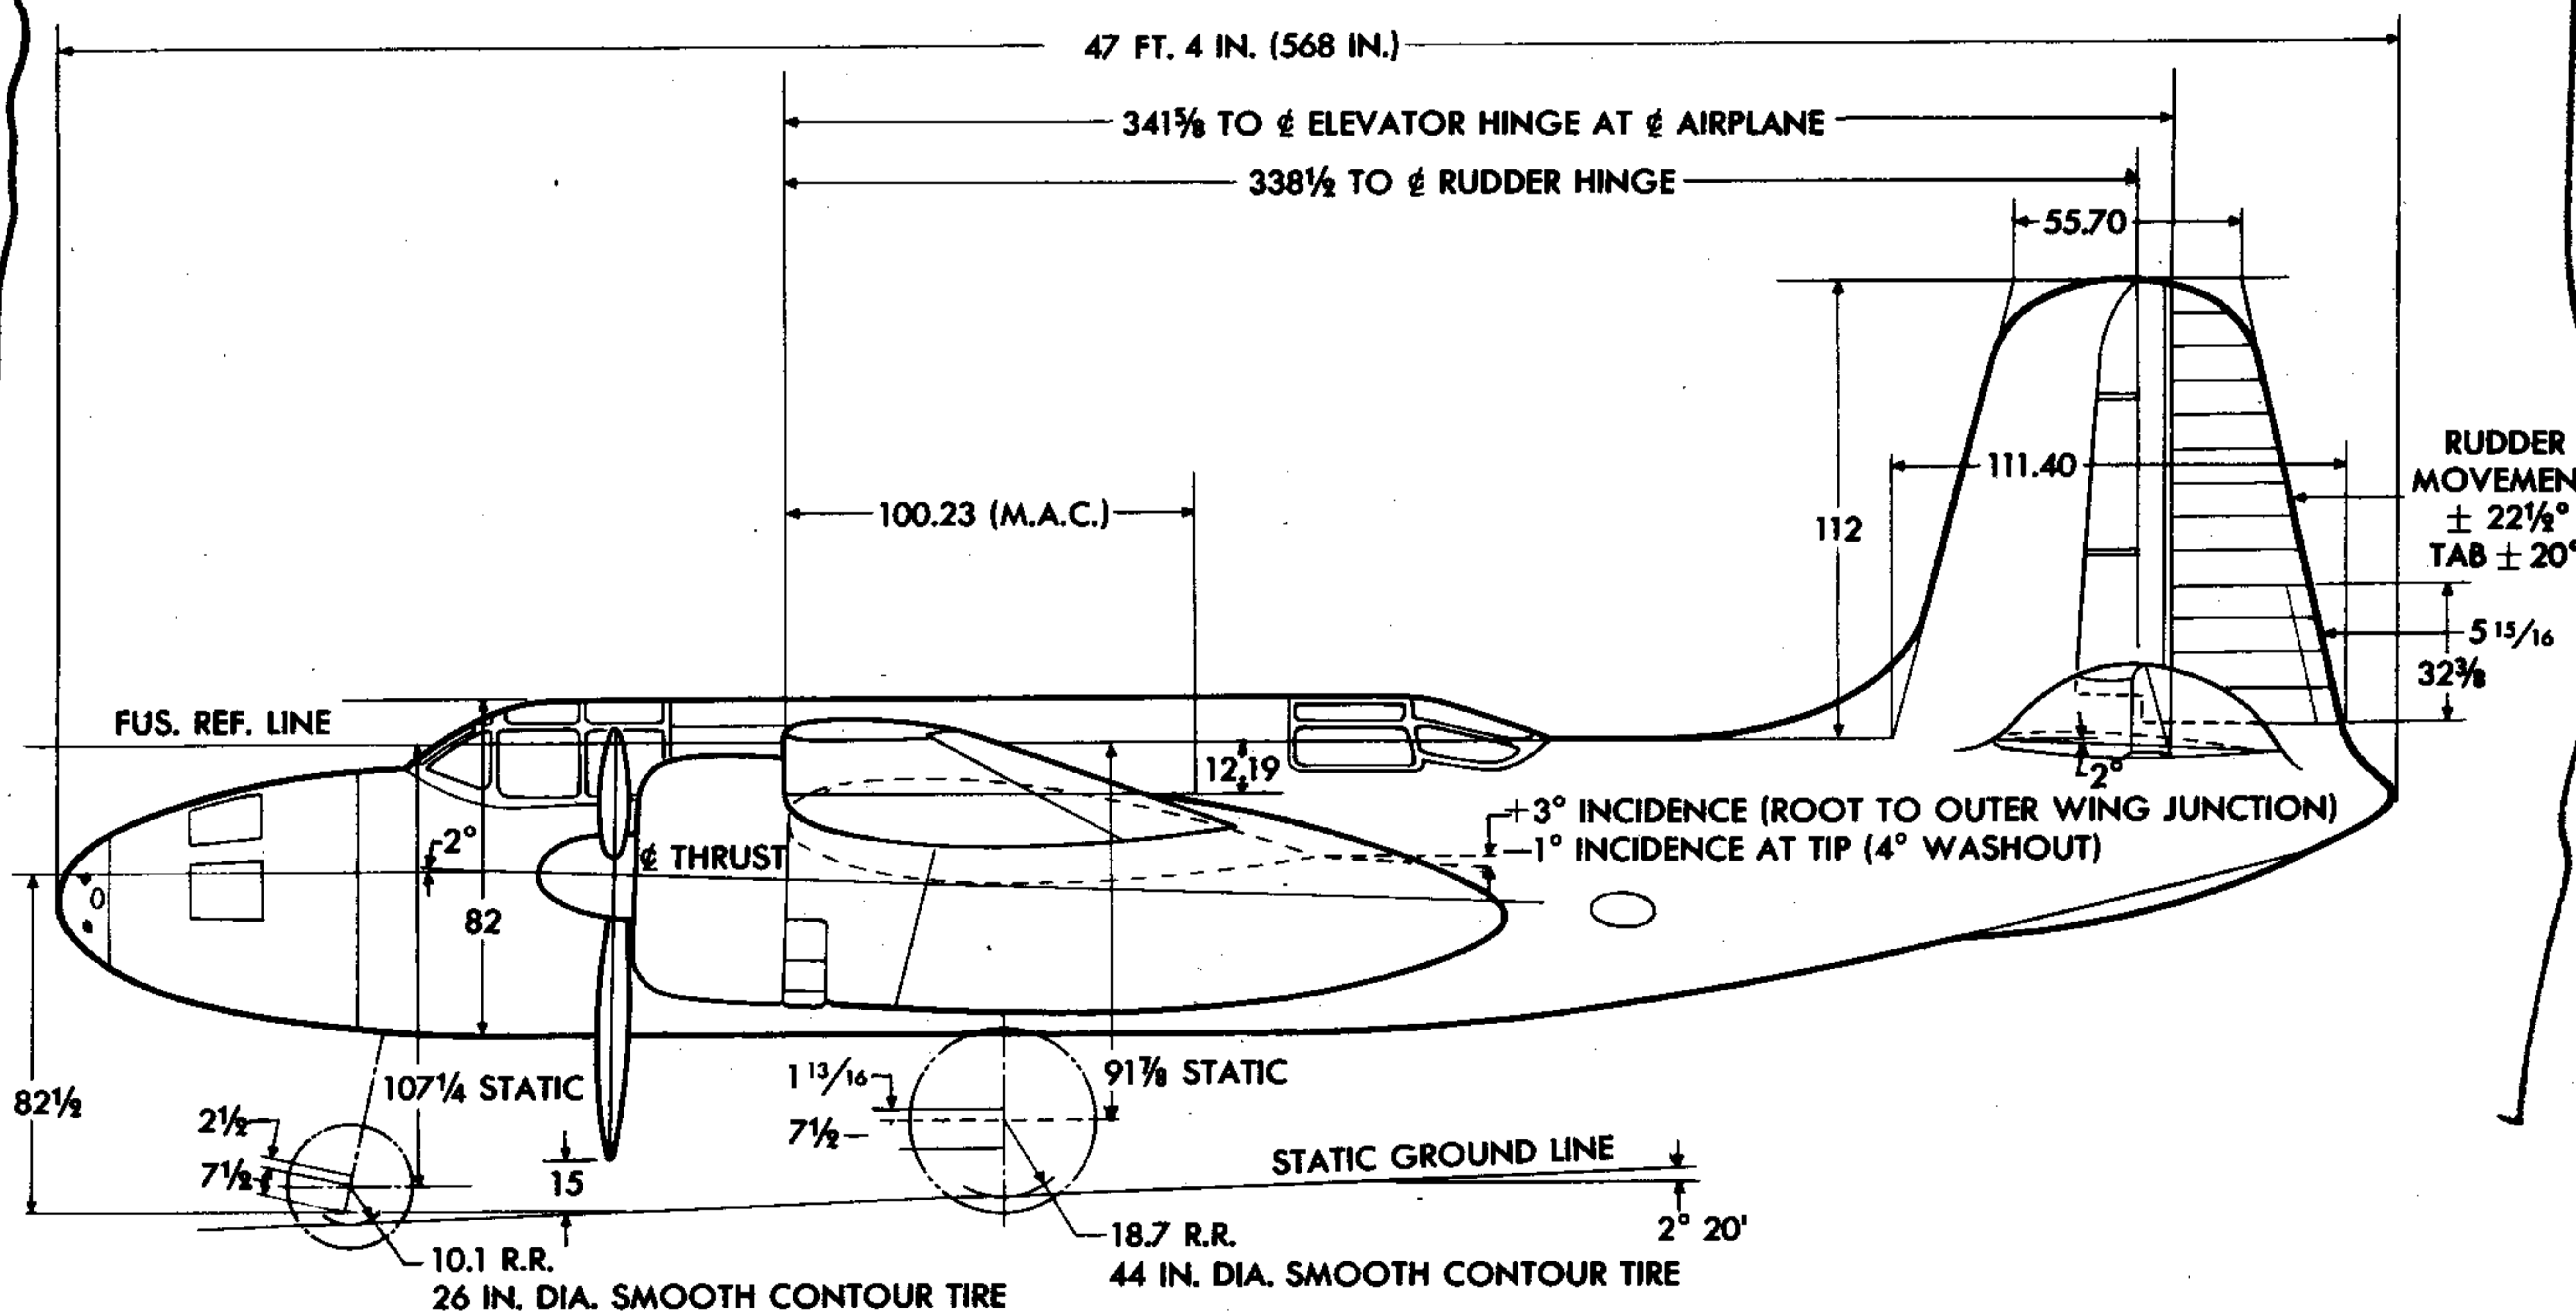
SIDE VIEW, SHOWING PRINCIPAL DIMENSIONS
